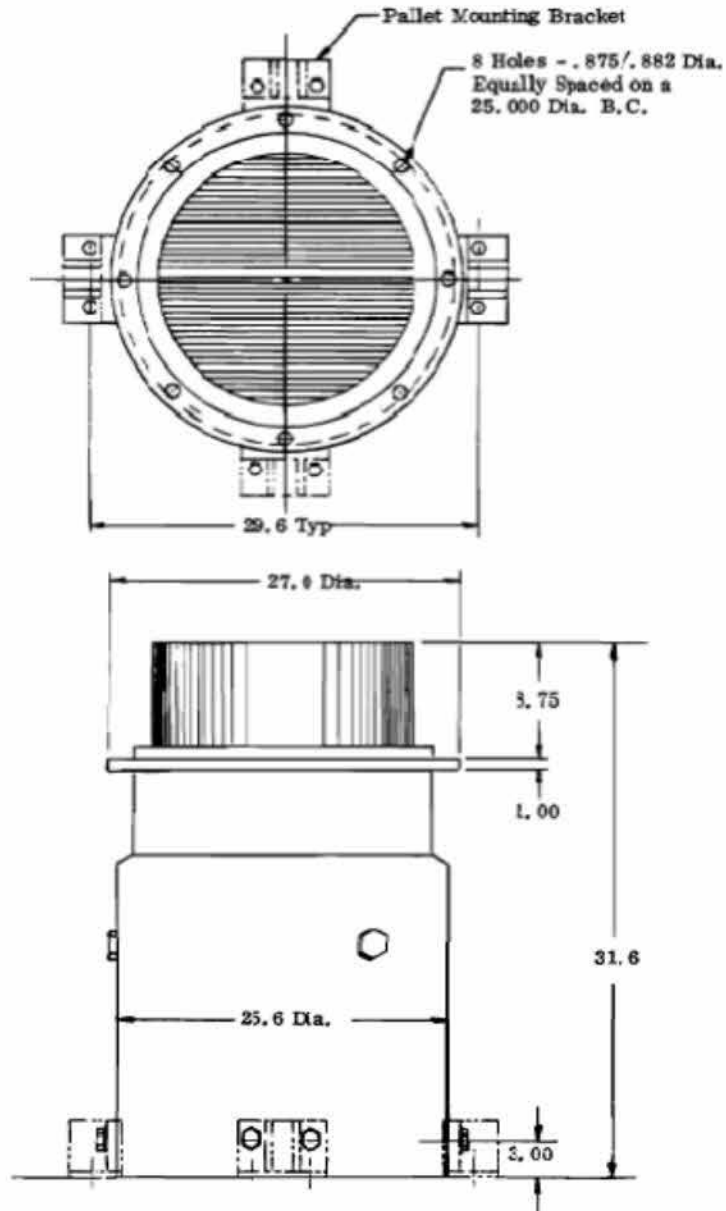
SENTINEL 25E EXTERNAL DIMENSIONS (IN INCHES)
